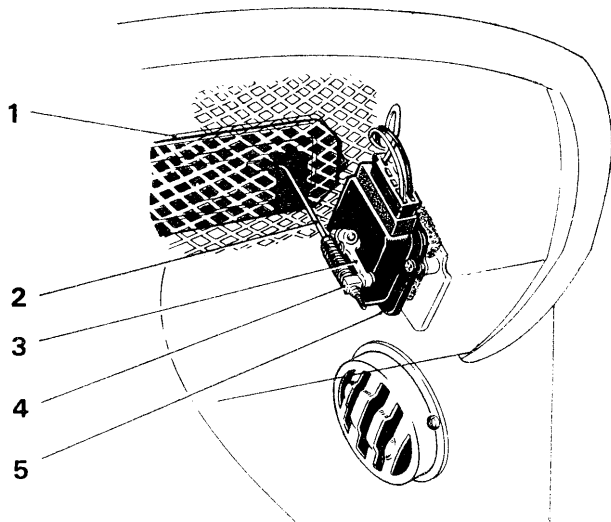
POSITION OF RECIRCULATION ACTUATOR
